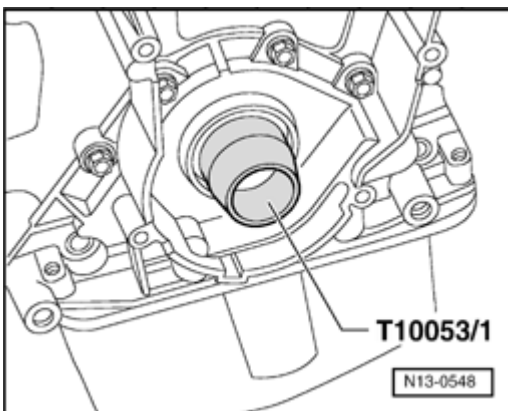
Identifying Guide Sleeve T10053/1 Mounted Onto Crankshaft Journal
